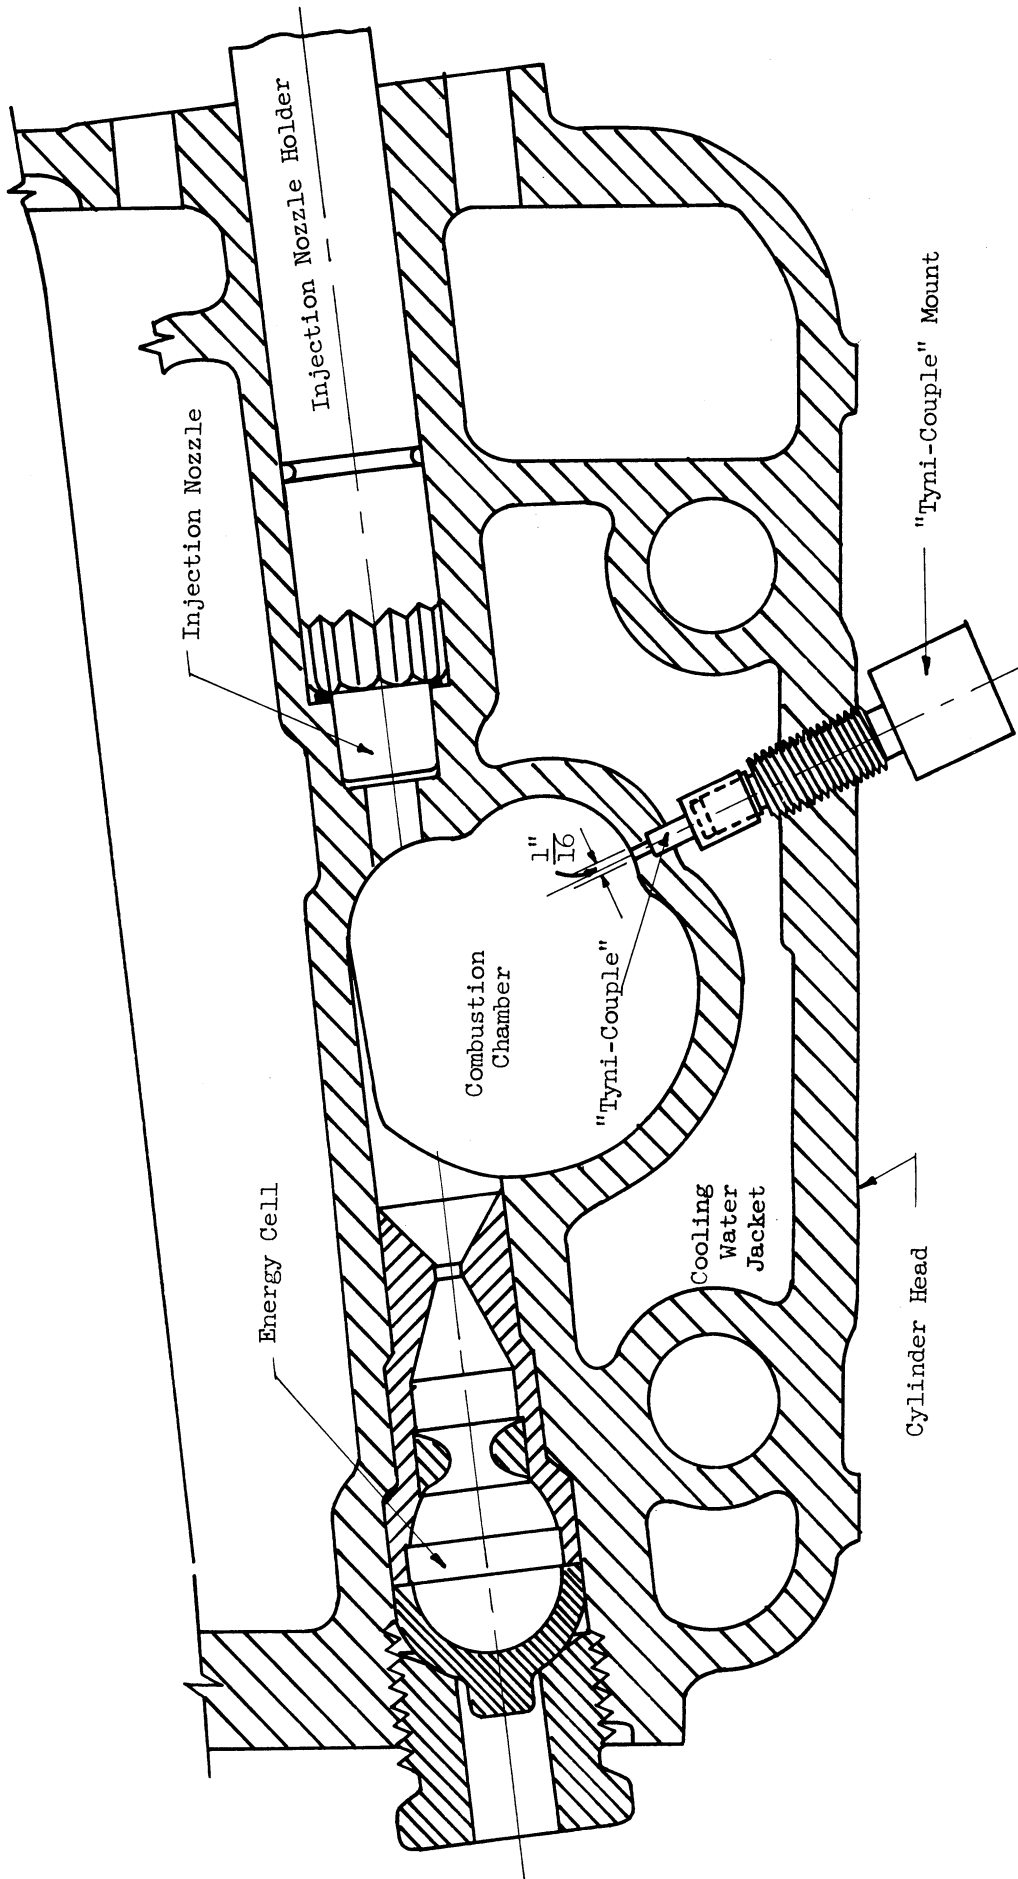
Sectional Plan of Cylinder Head Showing the Combustion-Chamber Thermocouple.
